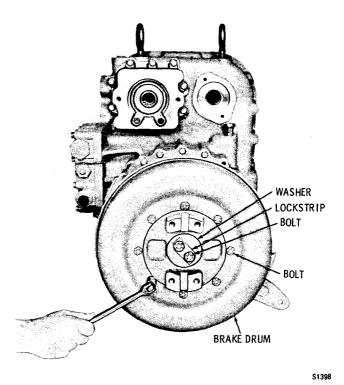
Removing parking brake drum bolts (-3 models)
